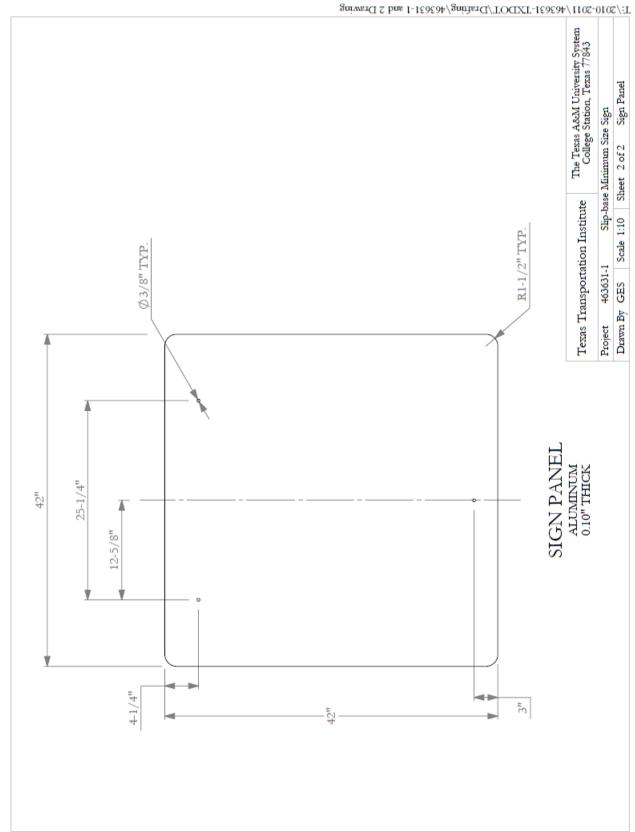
Details of the Sign Panel Used in Test Nos. 463631-1 and 463631-2.
